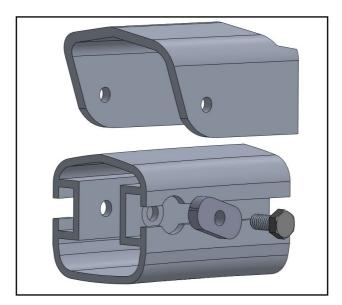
Slider and T-lock exploded view Source: Exero [7]
